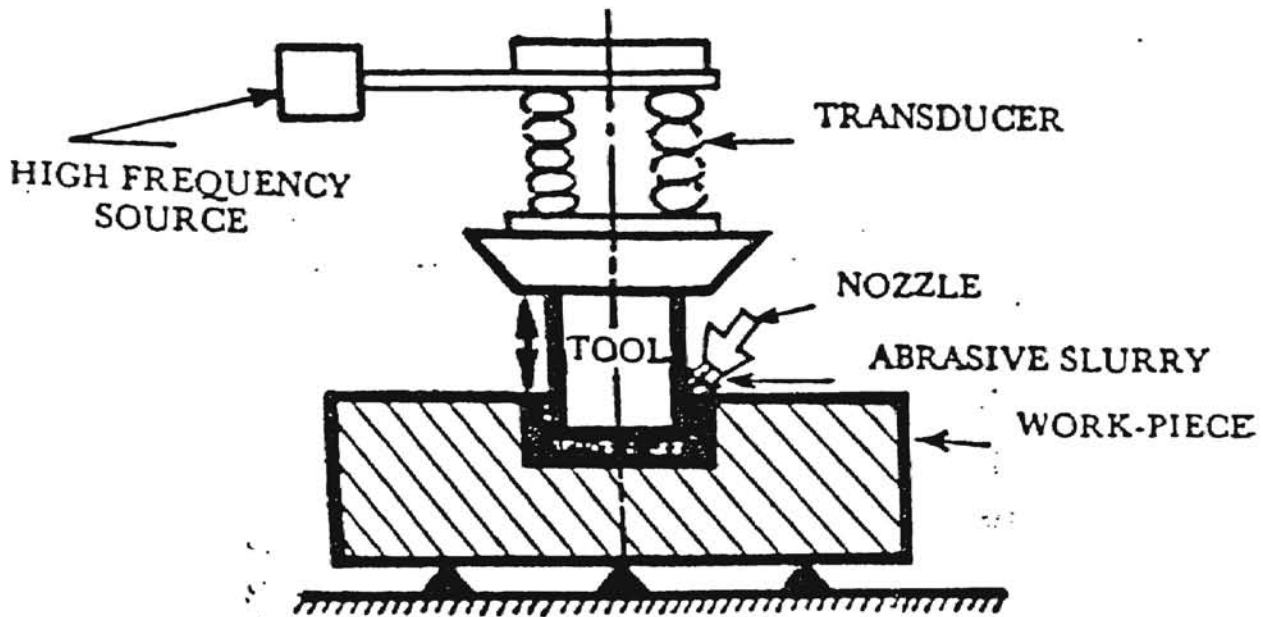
Typical Ultrasonic Machining Apparatus
